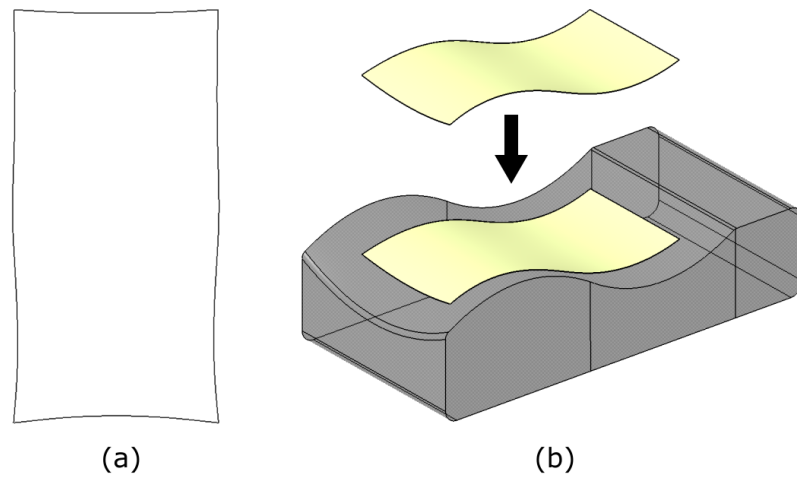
(a) Ply design for the mold life experiment tool and (b) schematic drawing of the ply laid up on the tool.
